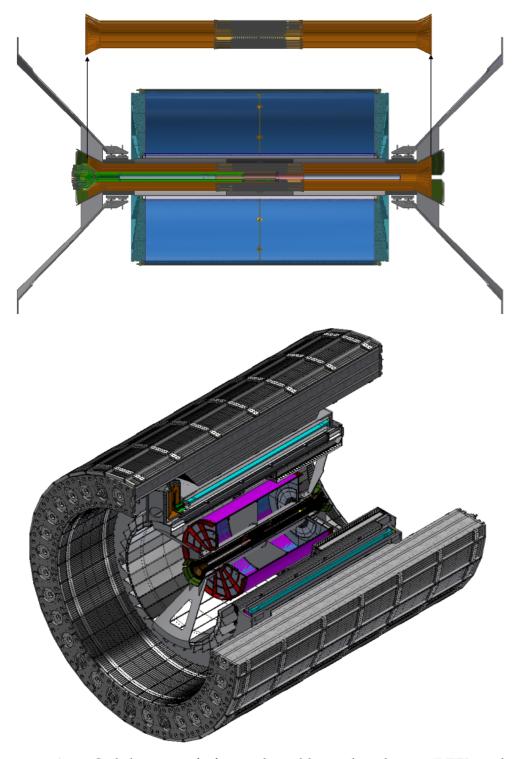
Auto-Cad drawing of of extender cables and cooling in INTT mechanical structure in sPHENIX.
